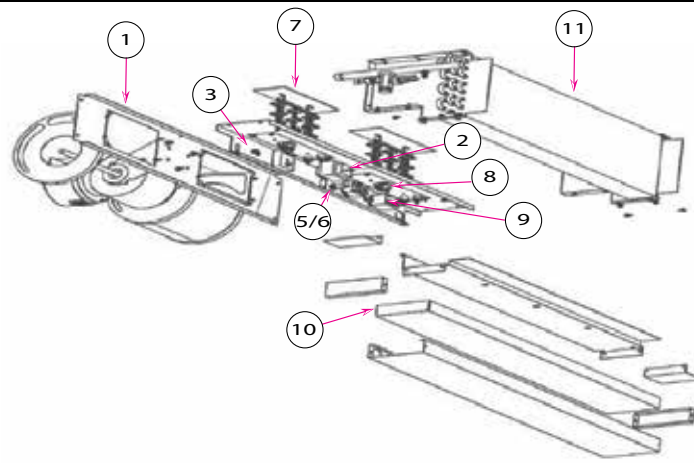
HE*1/ HE*3-*-DC Electric Heat Air Handler Replacement Parts Schematic
